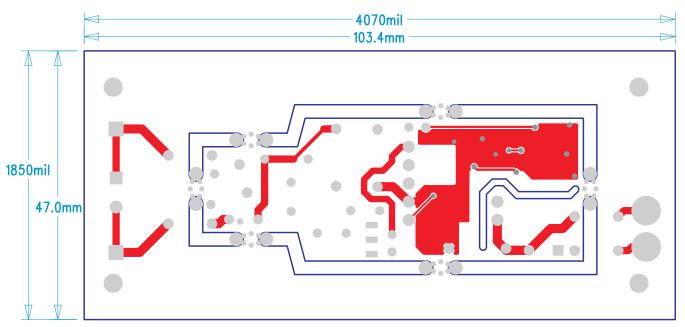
LM3447-A19-230VEVM Top Layer Copper (top view)
